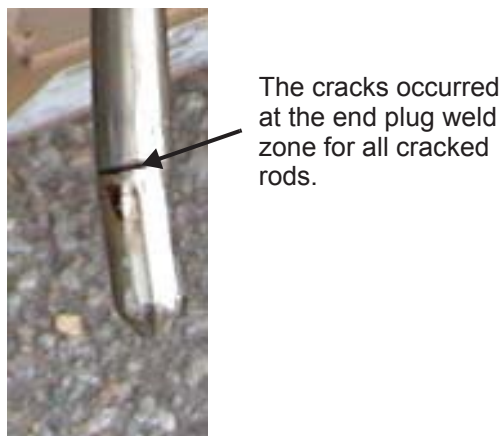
Cracked Rod From CTU Fuel Assembly
